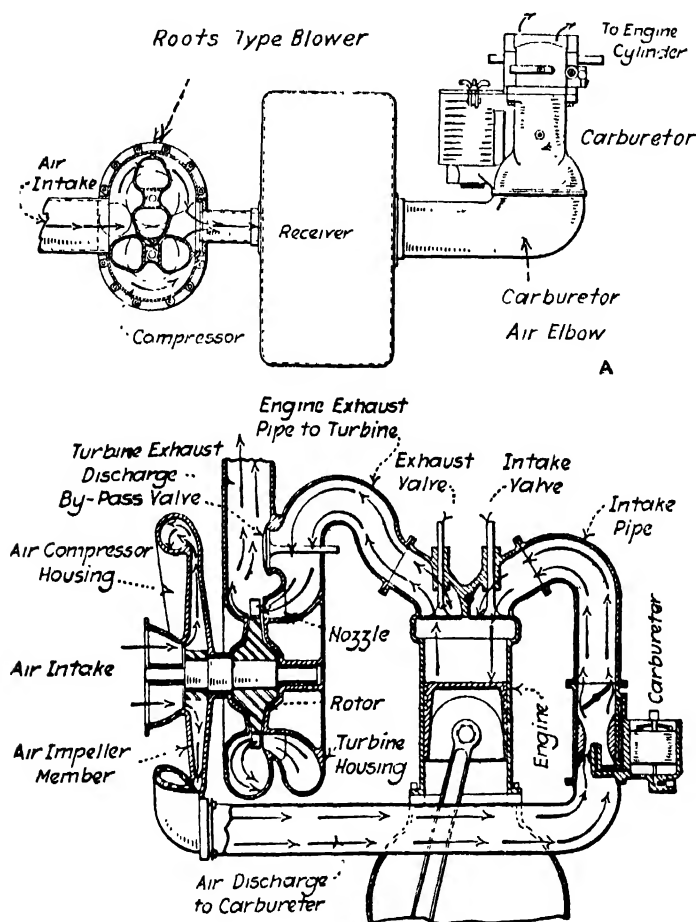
Simple Diagrams Showing Main Types of Airplane Engine Superchargers. A—Root's Blower, a Positive Displacement Type. B—Exhaust Driven Centrifugal Compressor.
